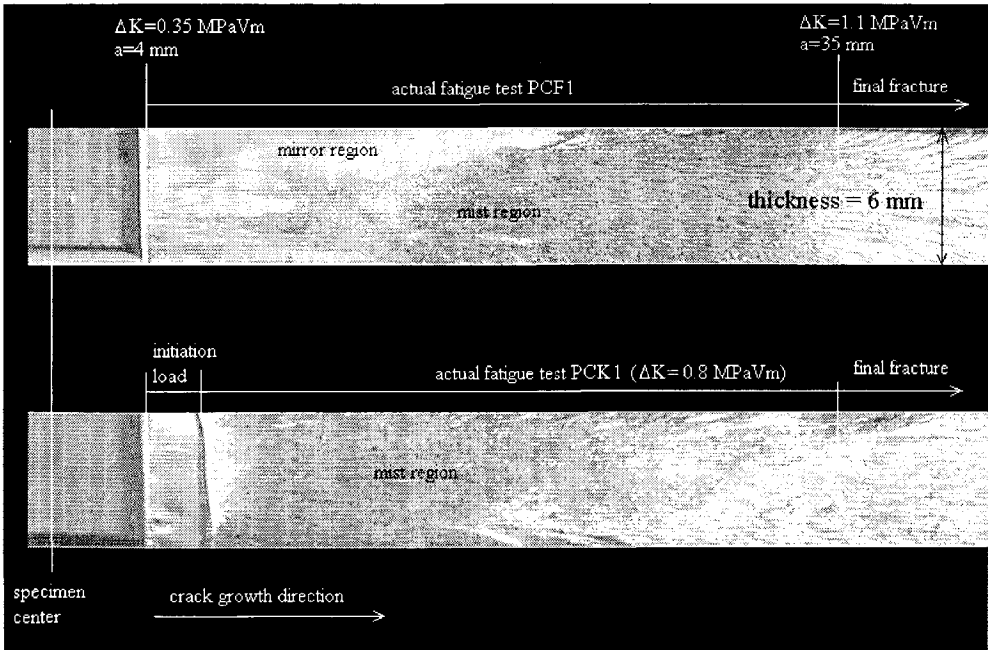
Fracture surfaces of fatigue-loaded polycarbonate (constant ΔK and CA testing respectively).
